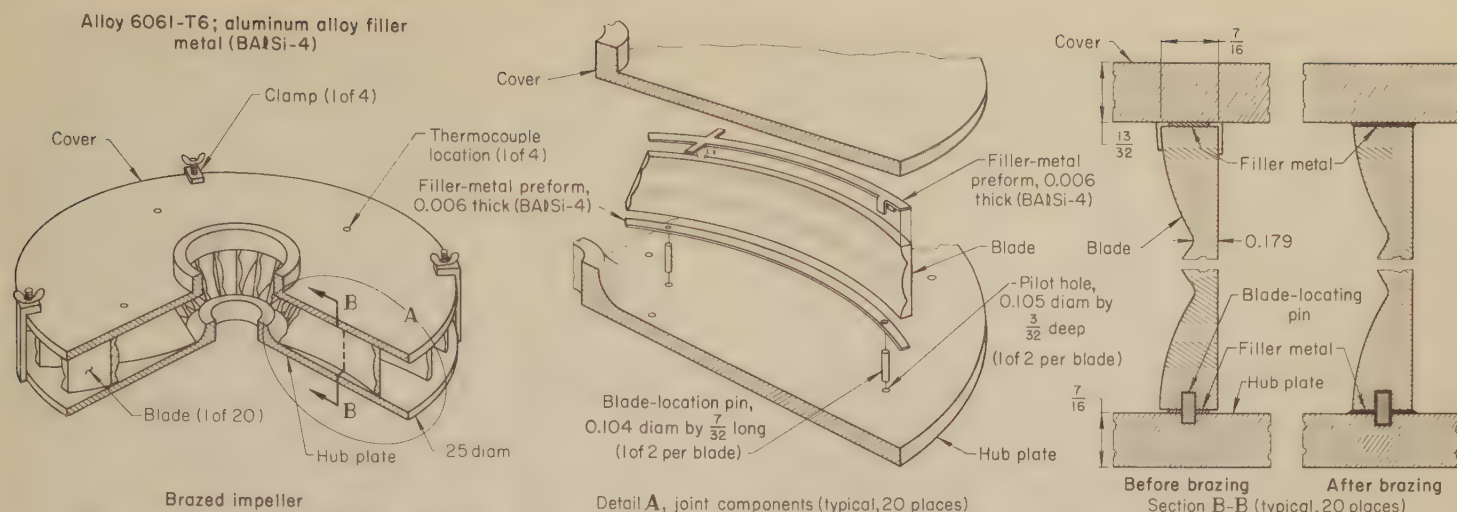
Furnace brazed impeller assembly, showing the locating pins used to hold the blades in position during brazing (Example 633)
